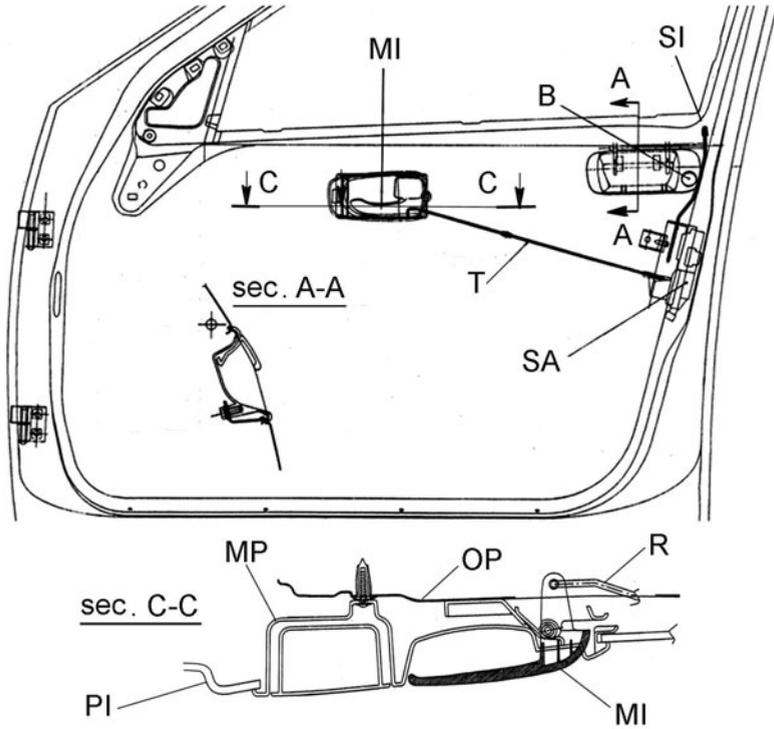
Typical lay-out of door lock controls. MI: inner handle; T: inner handle rod; B: key cylinder; SI: inner security rod; SA: latch with actuator; OP: door inner panel; R: rod; PI: door trim panel; MP: handle bezel.
